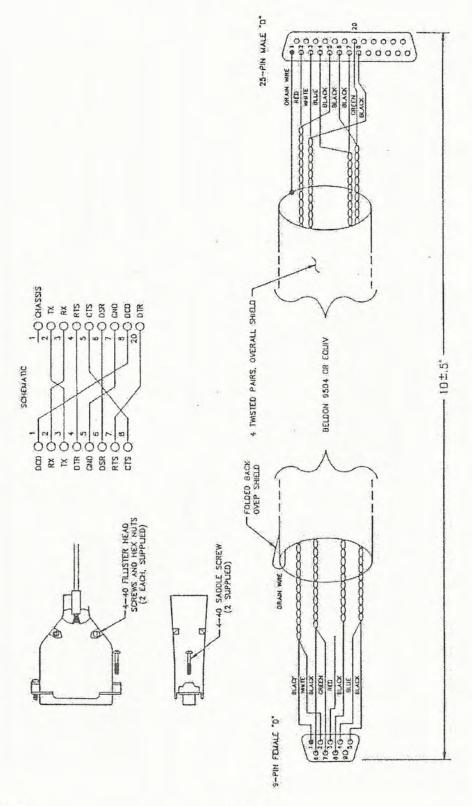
9F-25M Modem Cable 4x20 Assembly 24C1168 Rev A
